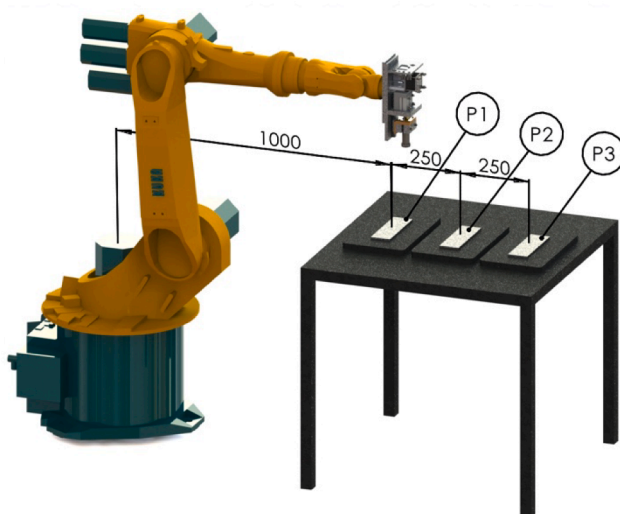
The three work areas used for part construction. P1, P2 and P3 are work areas 1, 2 and 3, respectively. The torch is mounted perpendicularly to the robot flange (perpendicular torch mounting – PTM).
